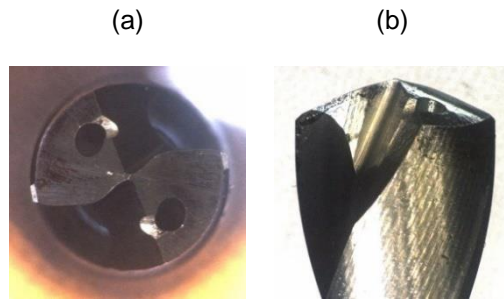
Example of drill designed and produced for Inconel 718 (a) face view (b) side view
